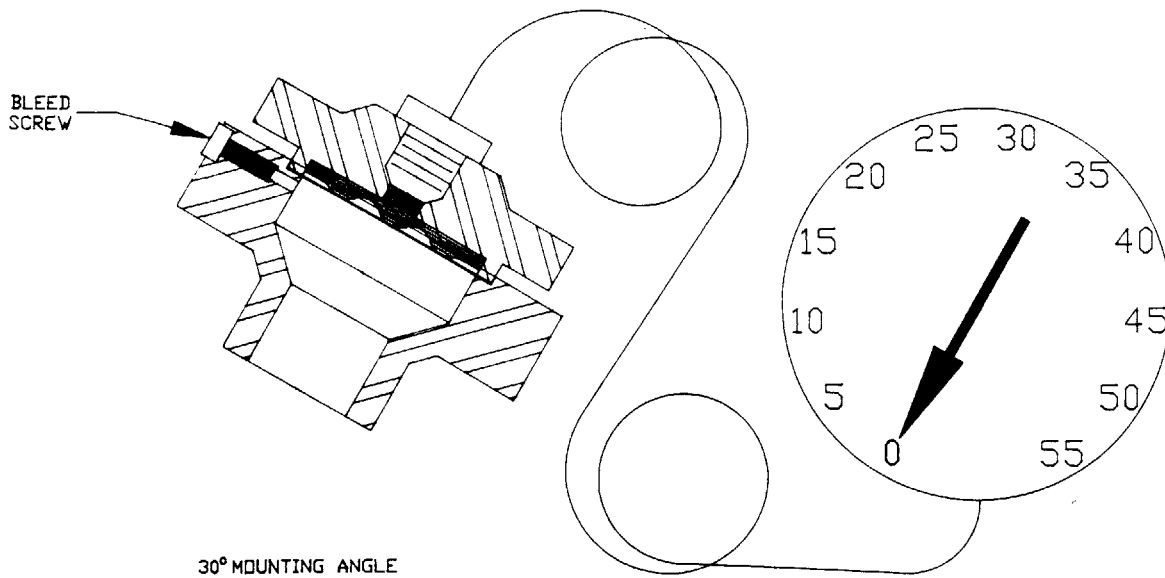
Superheater Tank Pressure Gauge and Diaphragm Arrangement
